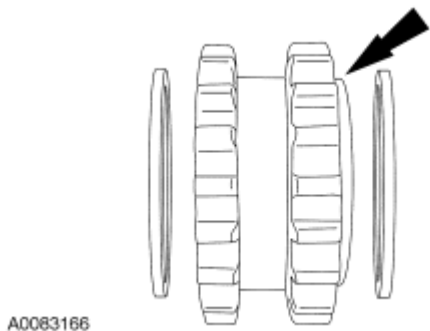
Locating Washers, Oil Pump Chain & Sprockets
